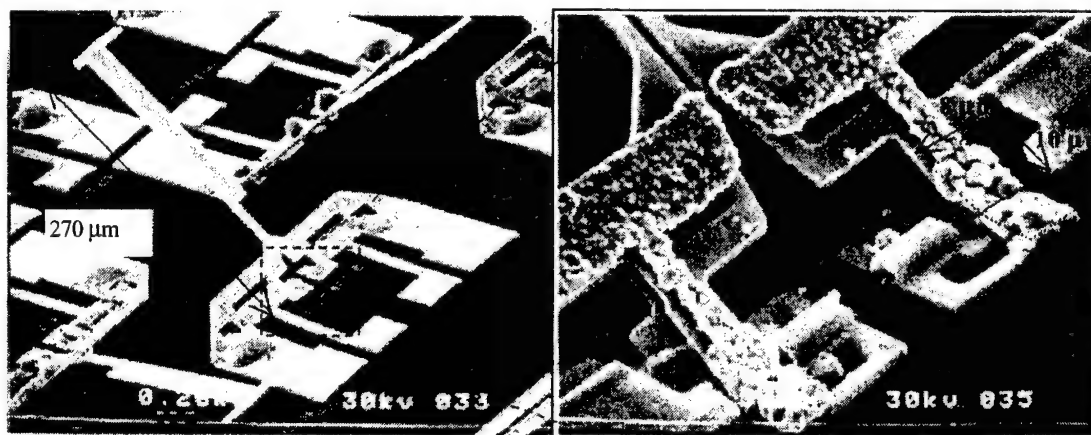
A solder self-assembled one-degree-of-freedom microrobot leg showing a close view of the center indium solder joints and outlines of gold pads.
